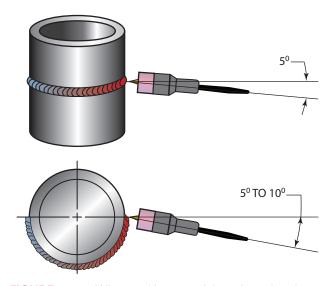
When making a straight stringer bead around a pipe in the horizontal fixed position, hold the torch at a 5° angle from horizontal and 5° to 10° from perpendicular to the pipe.
